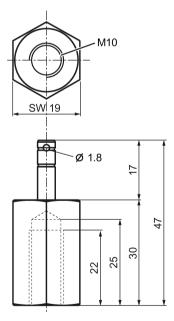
Dimension drawing of quick change holder 6GT2690-0AH10
